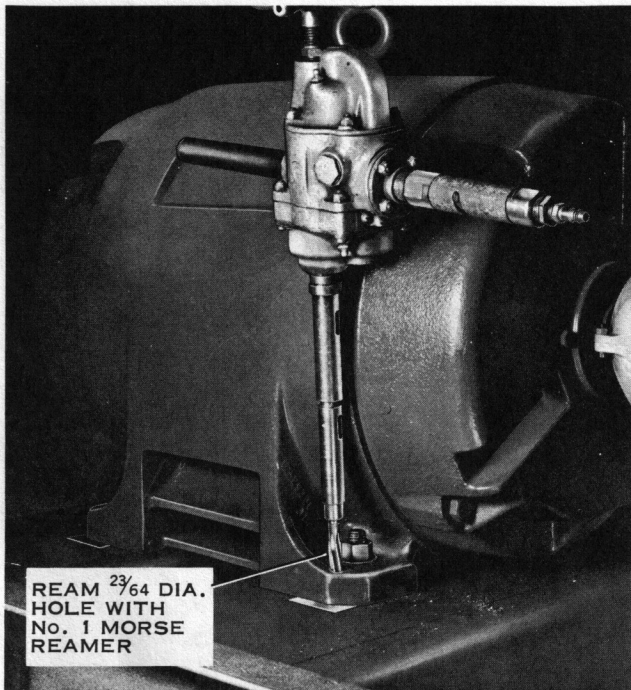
REAMING HOLE IN MOTOR FOOT, SHIM AND MOTOR SUPPORT
